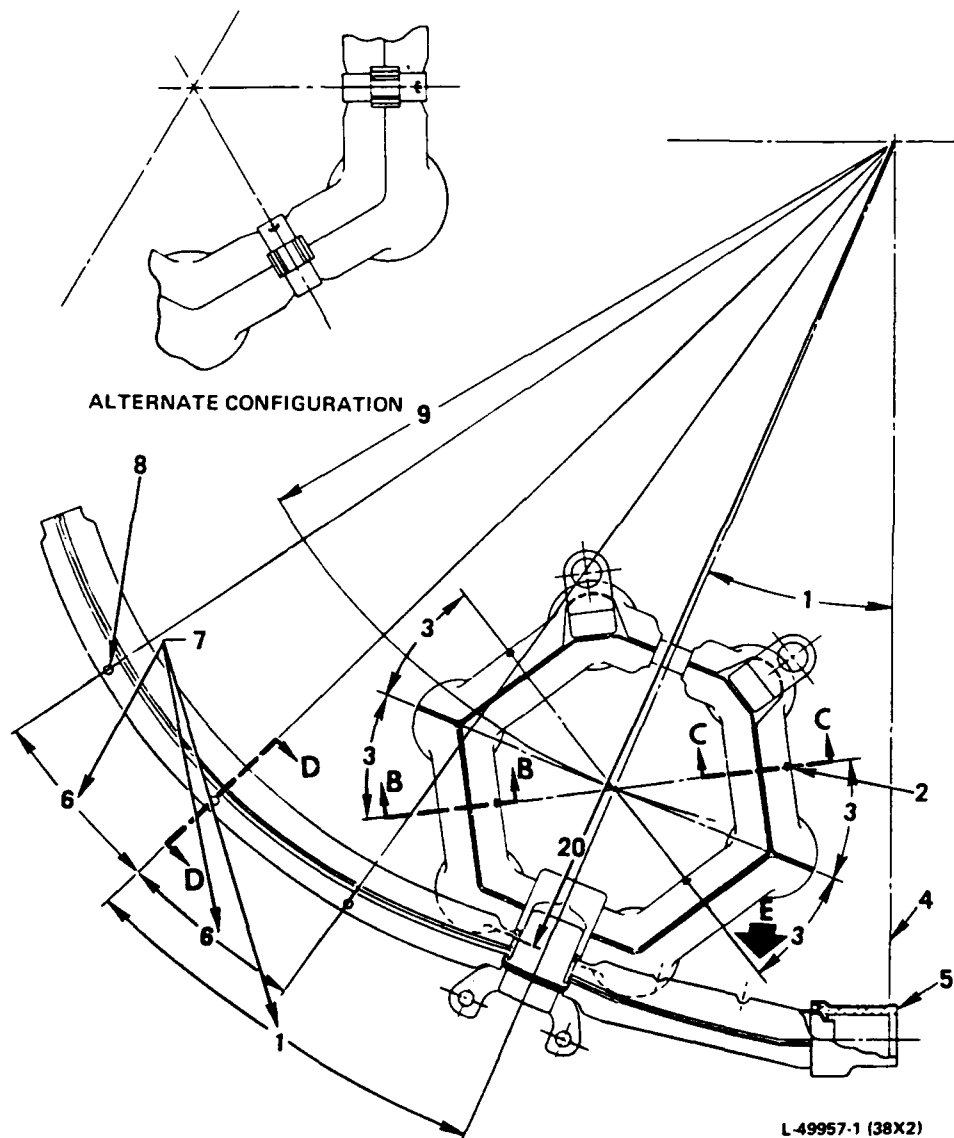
Fuel Manifold Heat Shield Insulation - Installation (Sheet 1)
